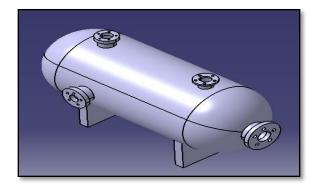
ELLIPTICAL HEAD IN CATIA
